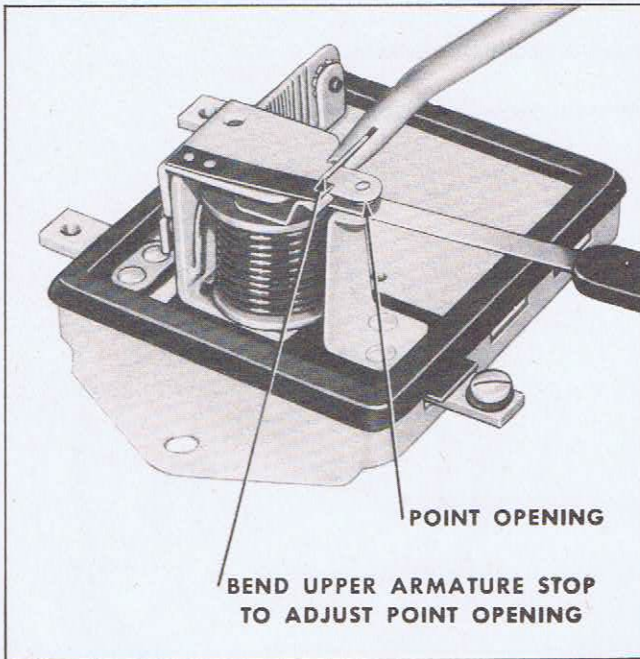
CUTOUT RELAY POINT OPENING CHECK AND ADJUSTMENT.
